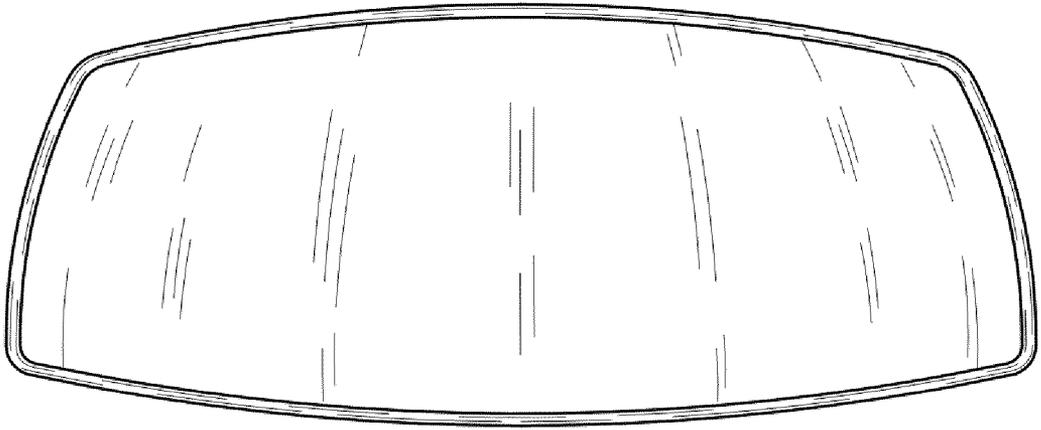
is a top plan view of the rear-view mirror device shown in FIG. 1;
